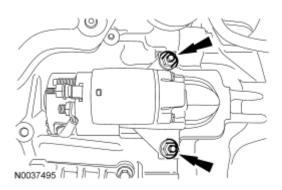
Locating Ground Wire Bolt Courtesy of FORD MOTOR CO.
